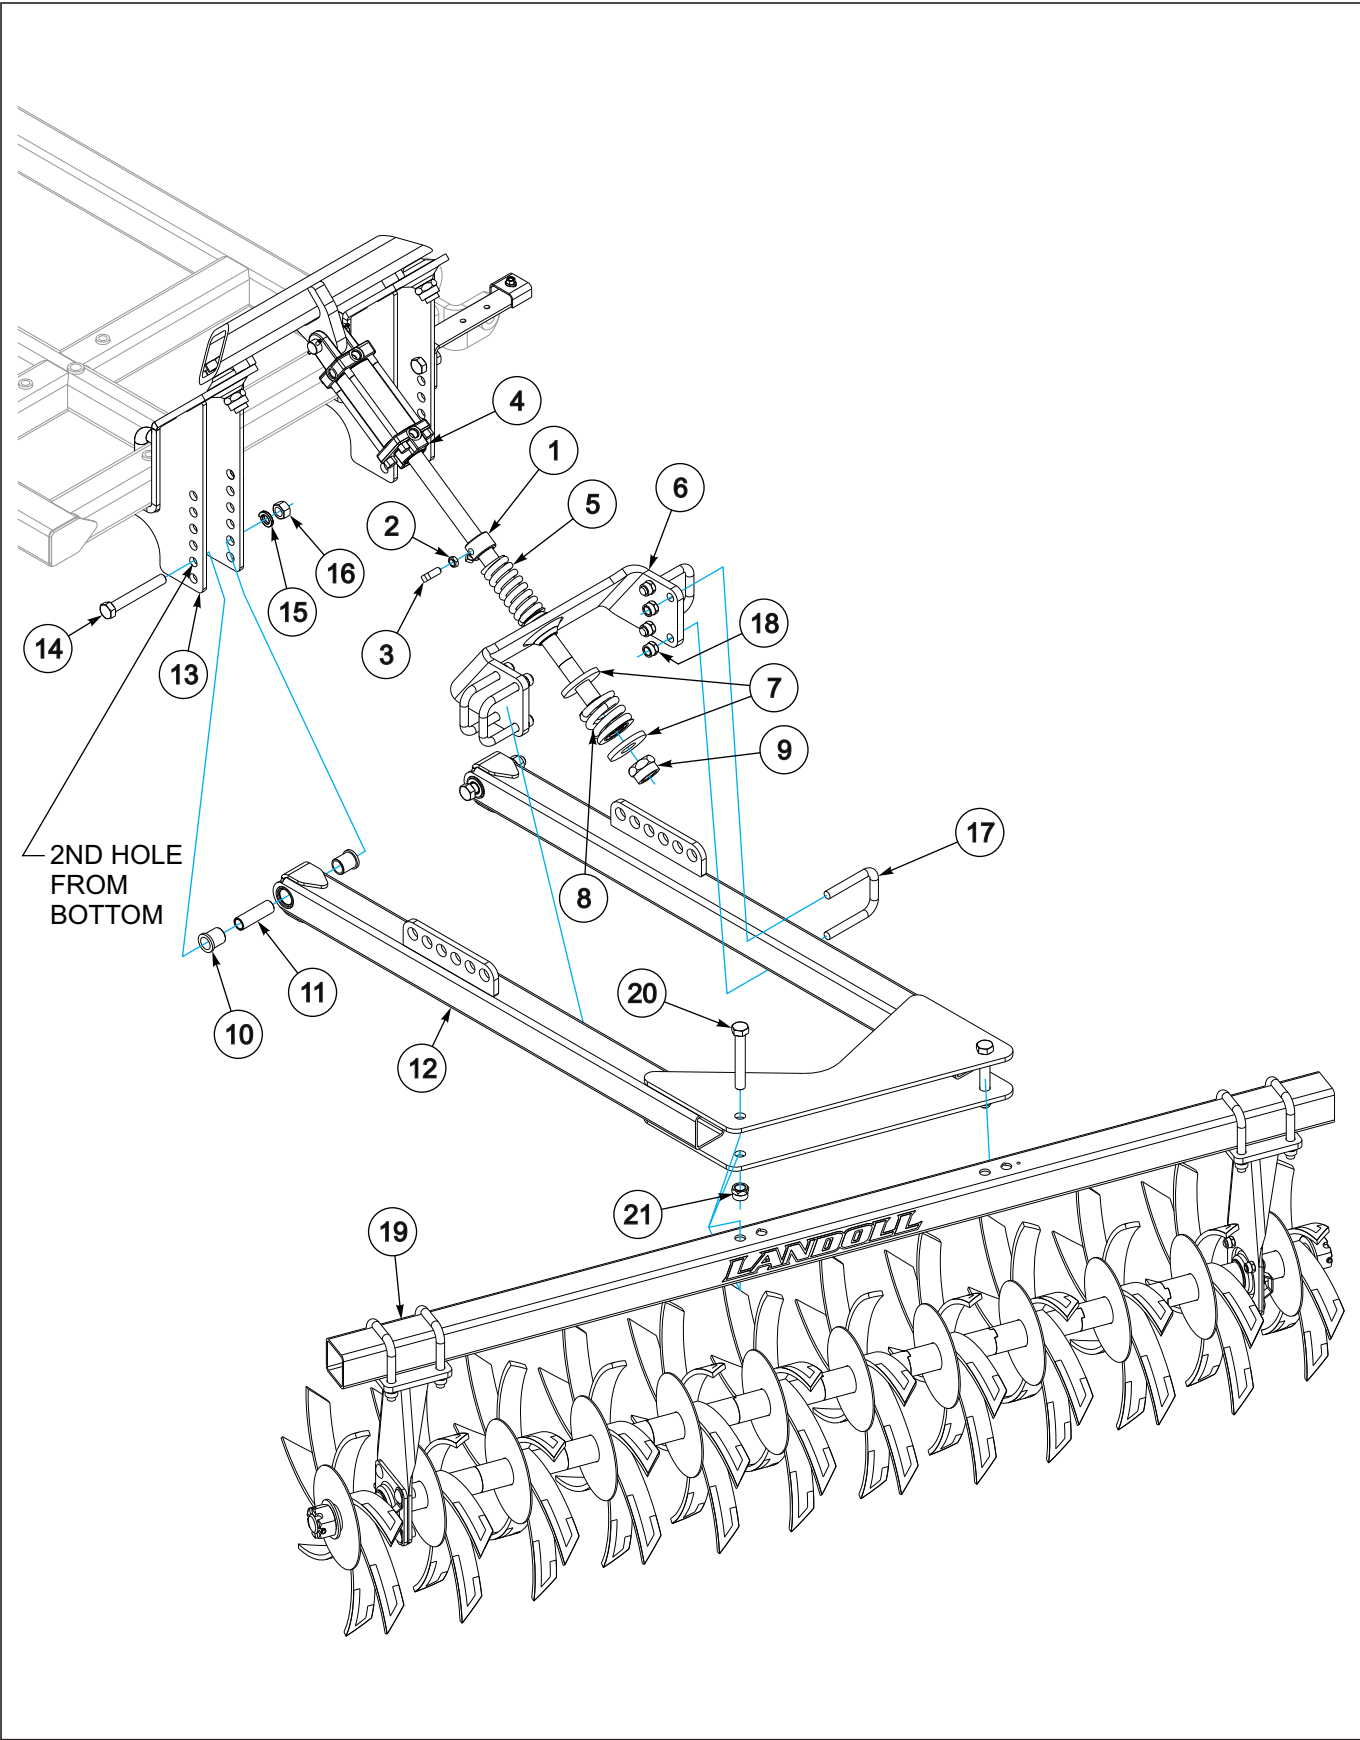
Hydraulic Bracket & Treader Assembly Hydraulic
